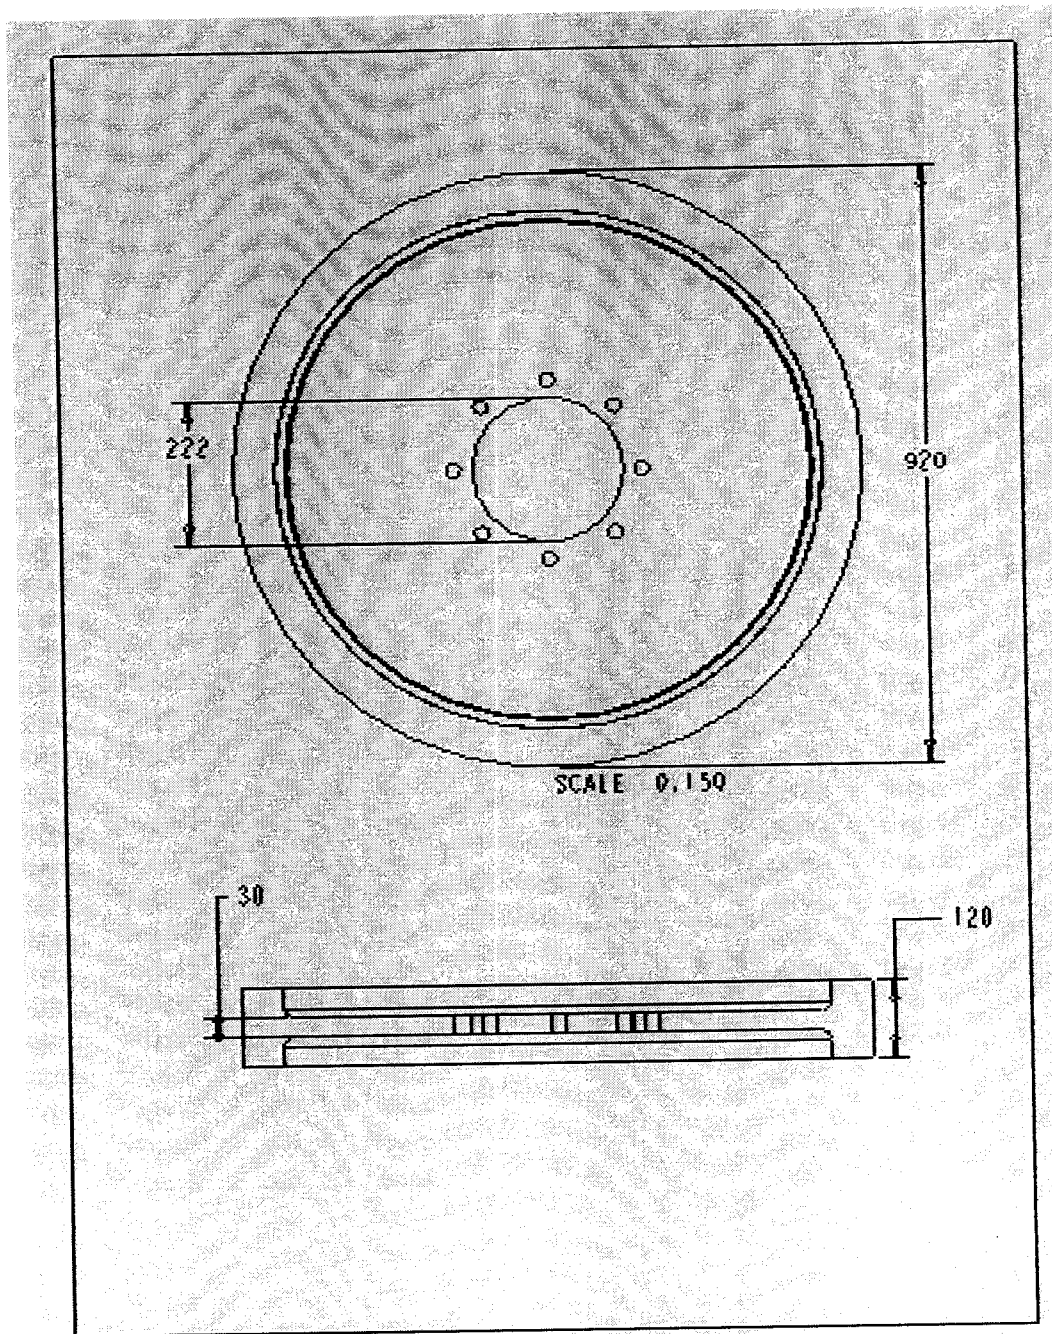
DETAILED DESIGN OF BURST WHEEL
